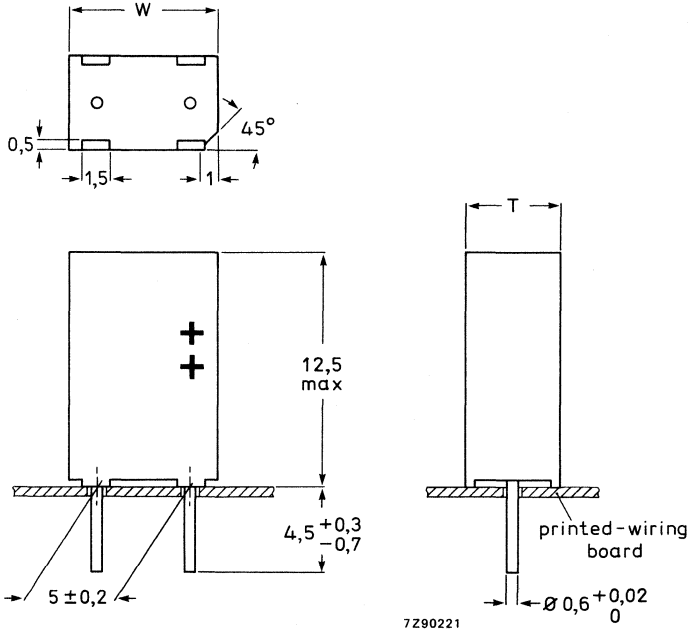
Style 1; see Table 1a for dimensions T and W.
